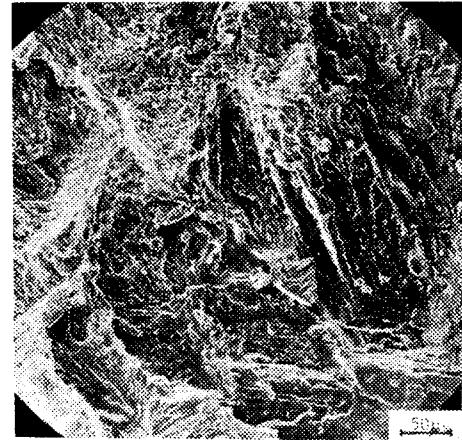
Fractographs welded specimen by wet electrode at $\sigma=50\text{kg/mm}^2$
